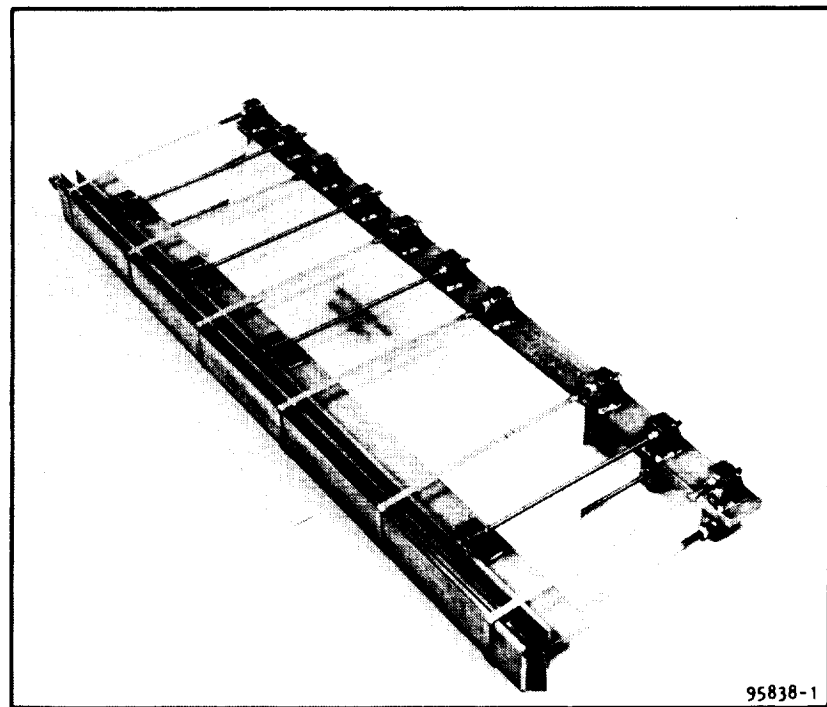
Hot-Sizing/Braze Fixture with Dummy Part
